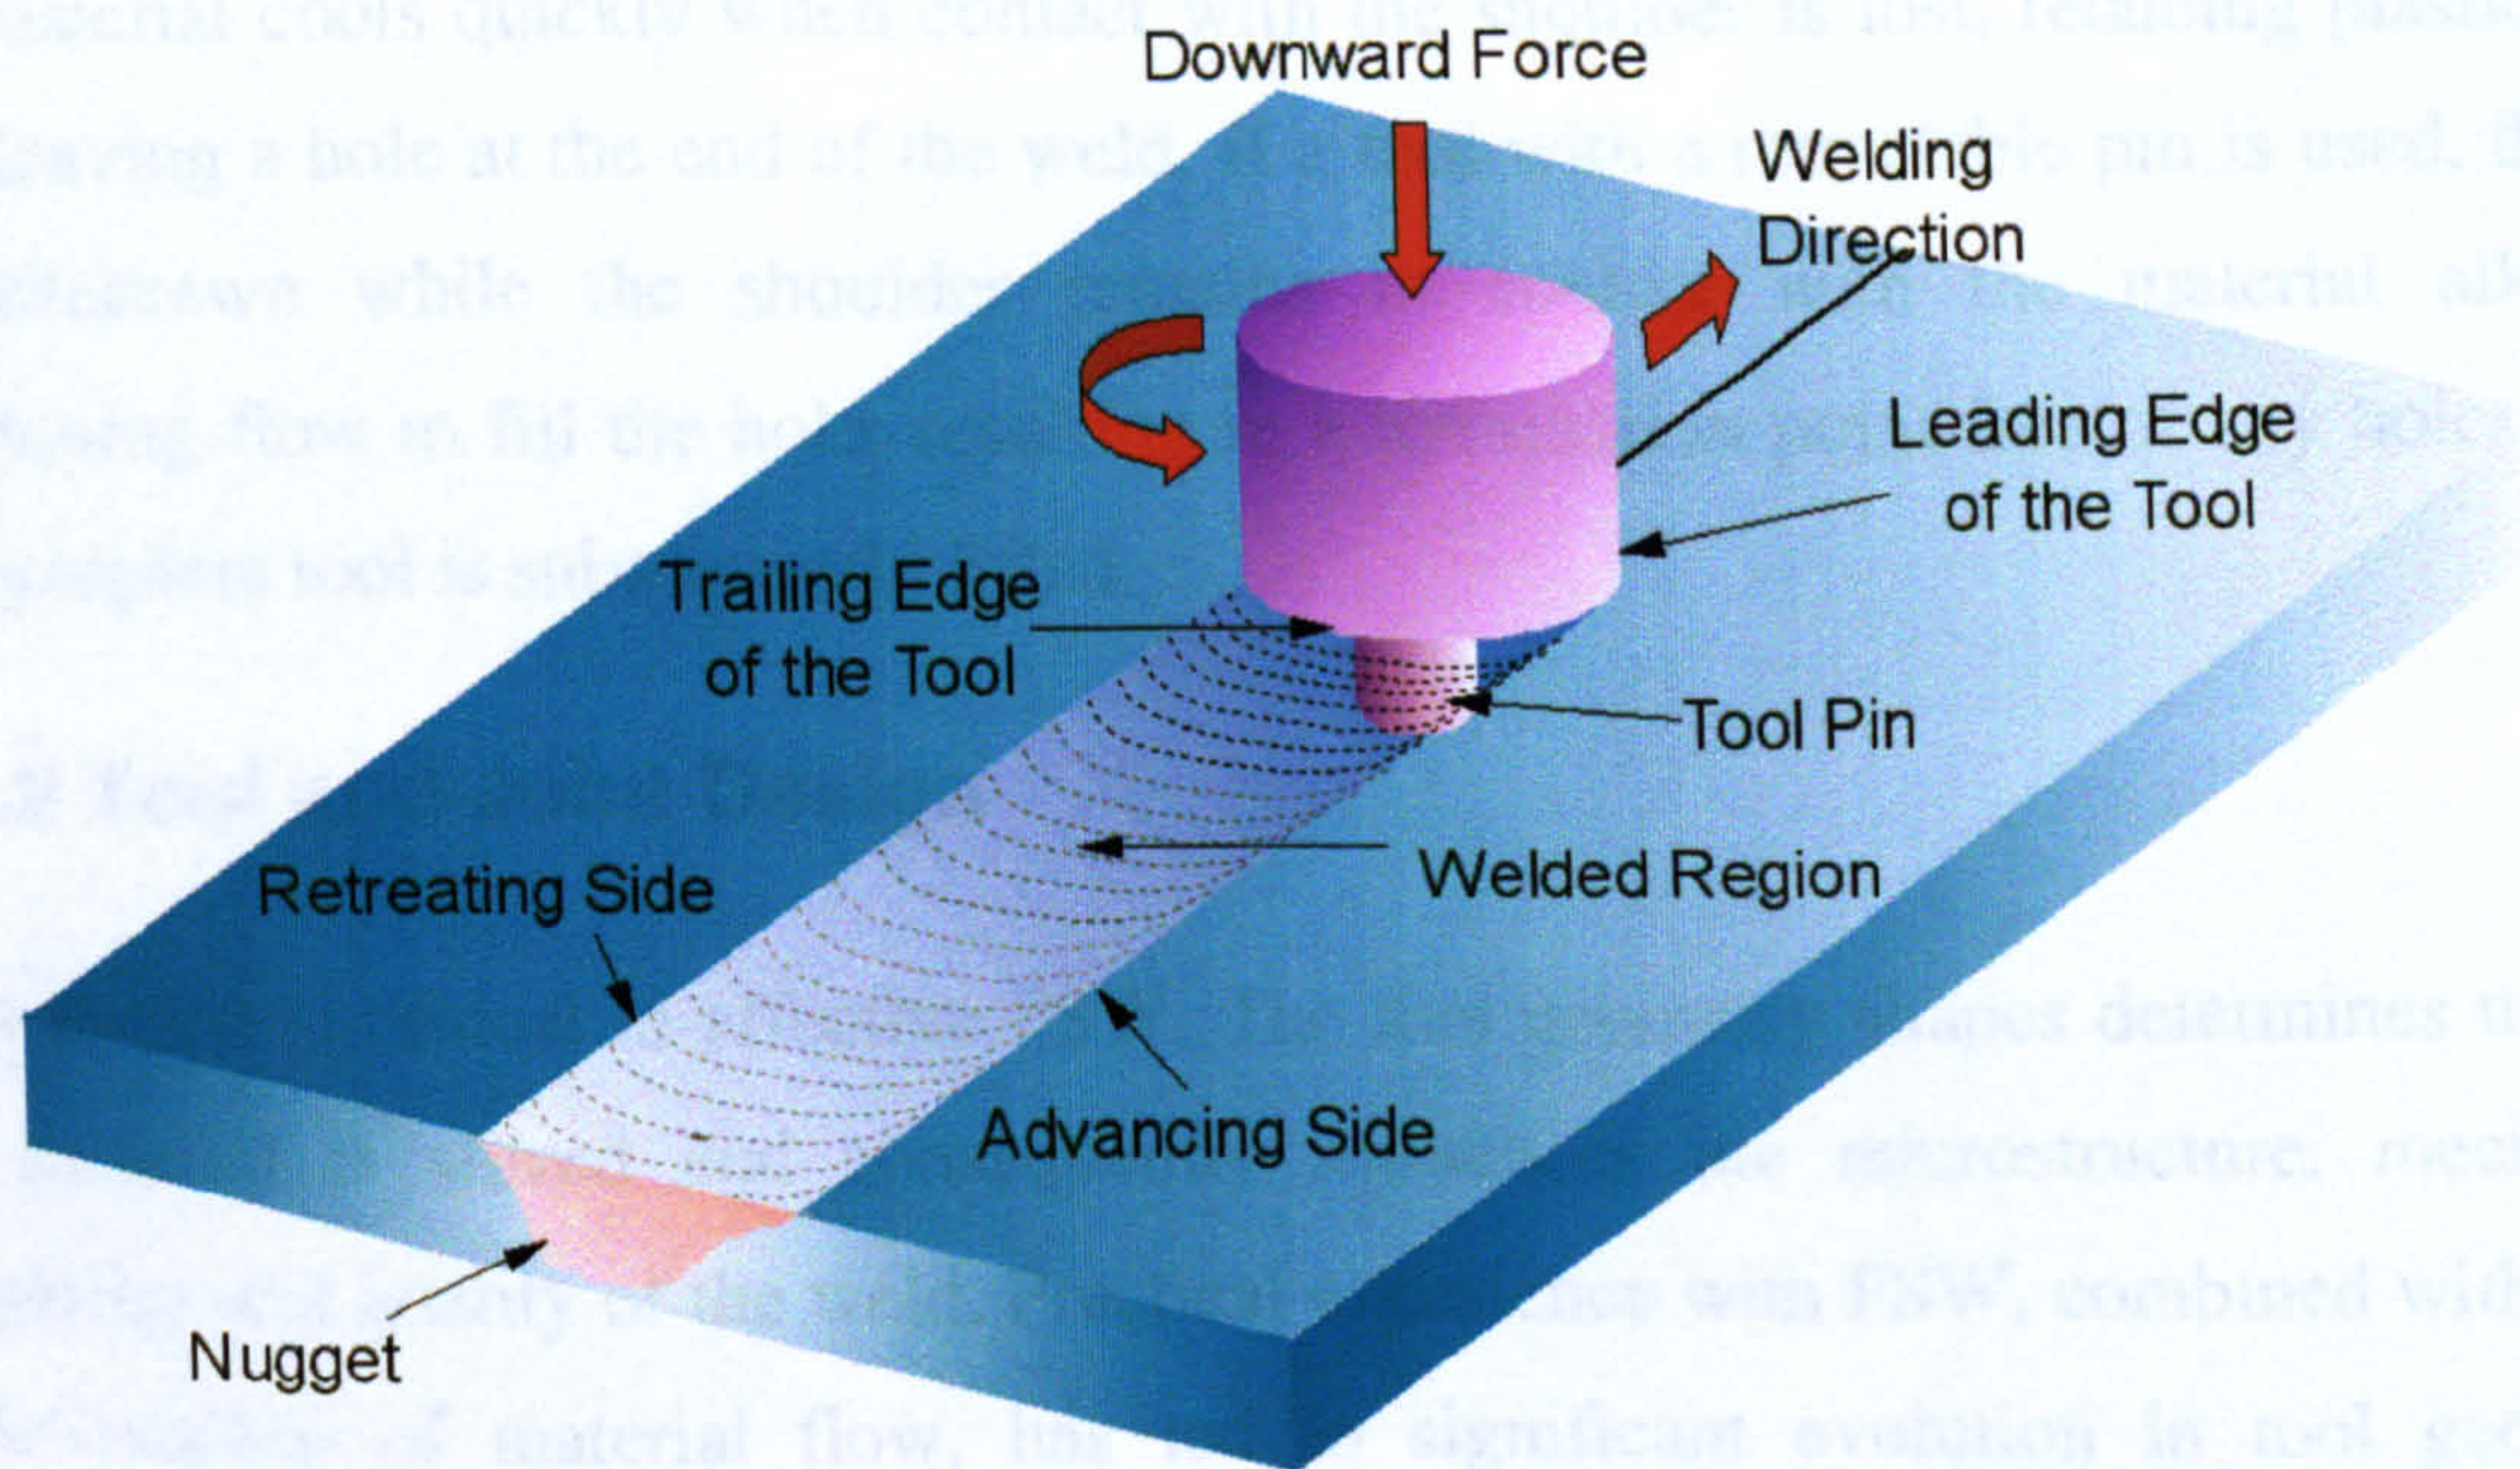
Schematic illustration of Friction Stir Welding.
